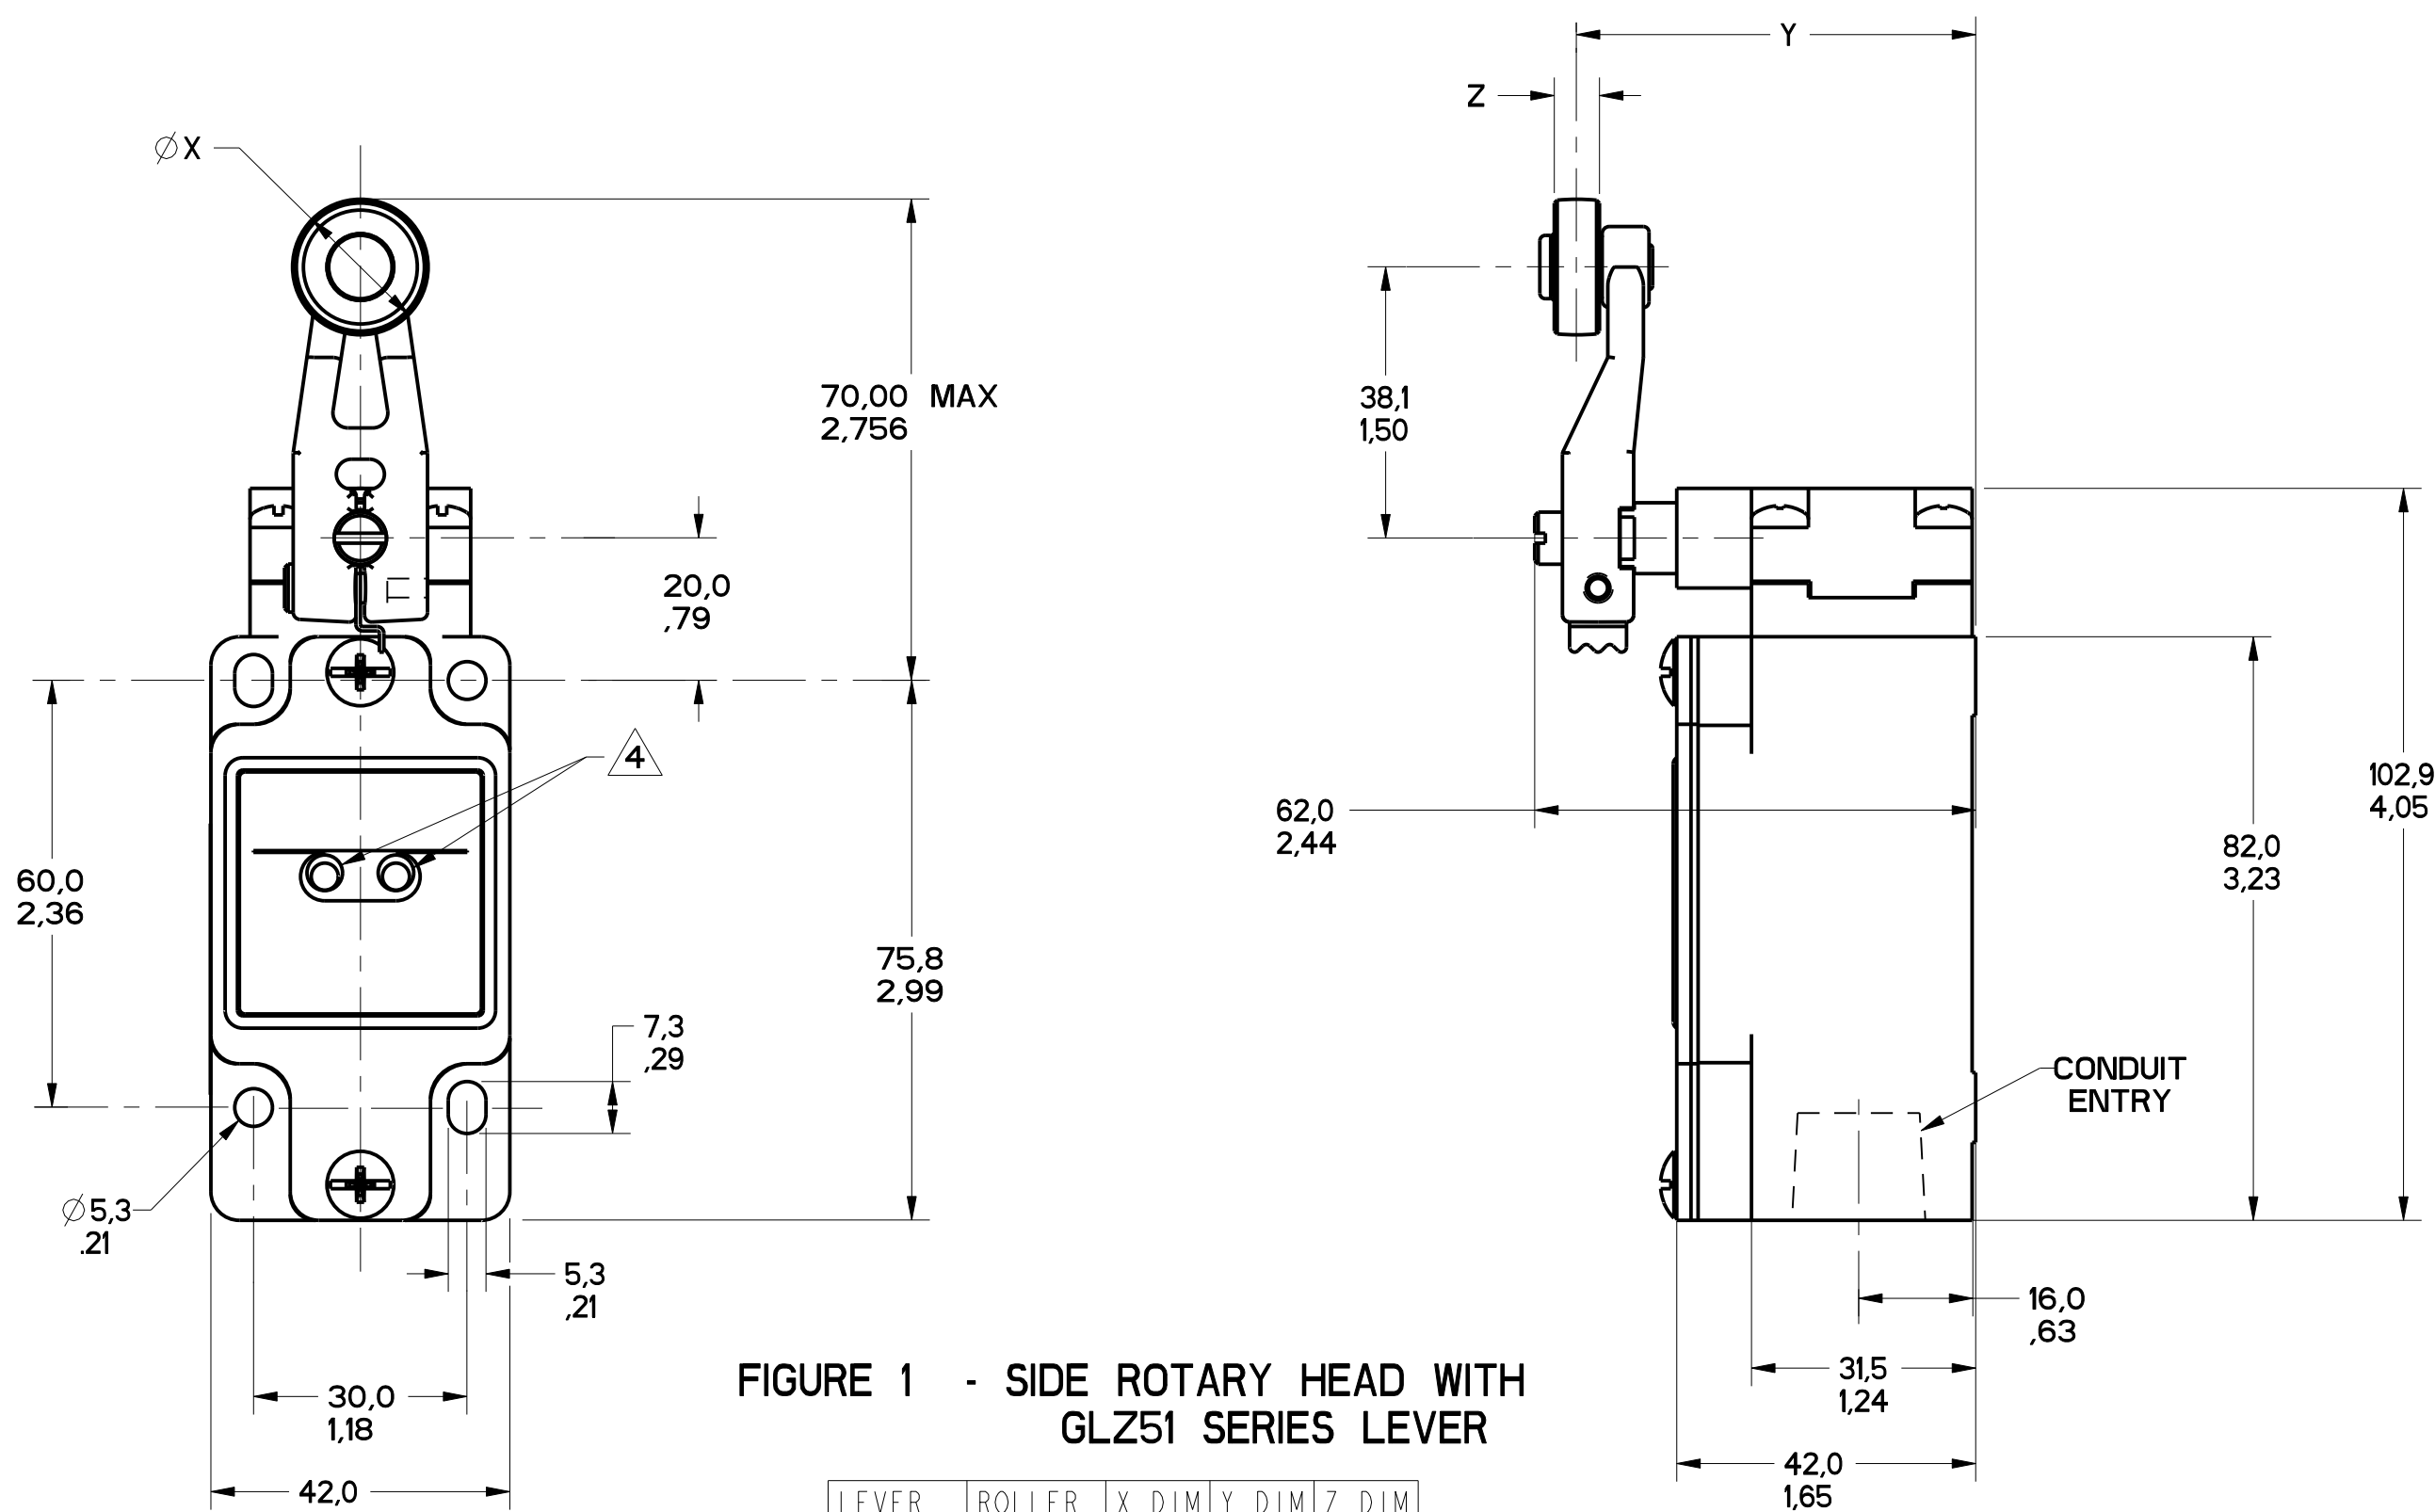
SIDE ROTARY HEAD WITH GLZ51 SERIES LEVER
